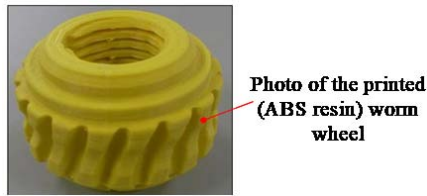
Design process of the worm wheel, showing a photo of the printed wheel in ABS resin
